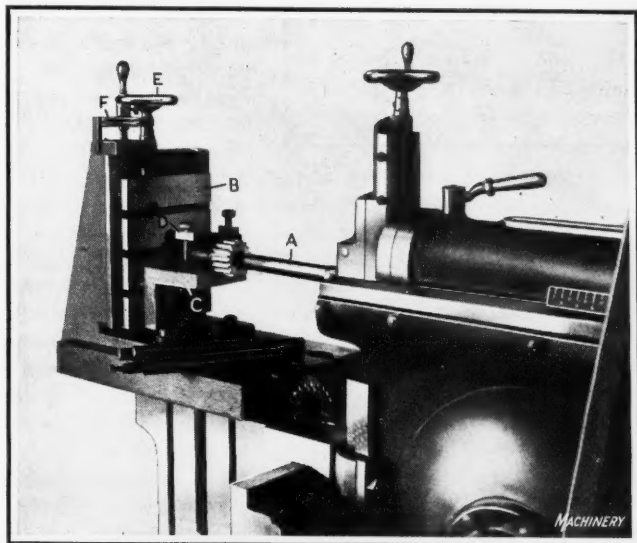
Use of a Keyseating Fixture for machining the Keyway in Bronze Sleeve Gears for Shapers
